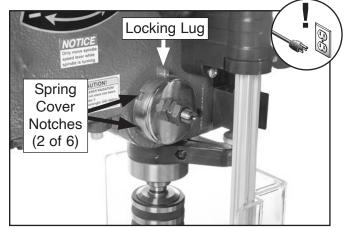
Location of spring cover notches and locking lug (T33960 shown).
